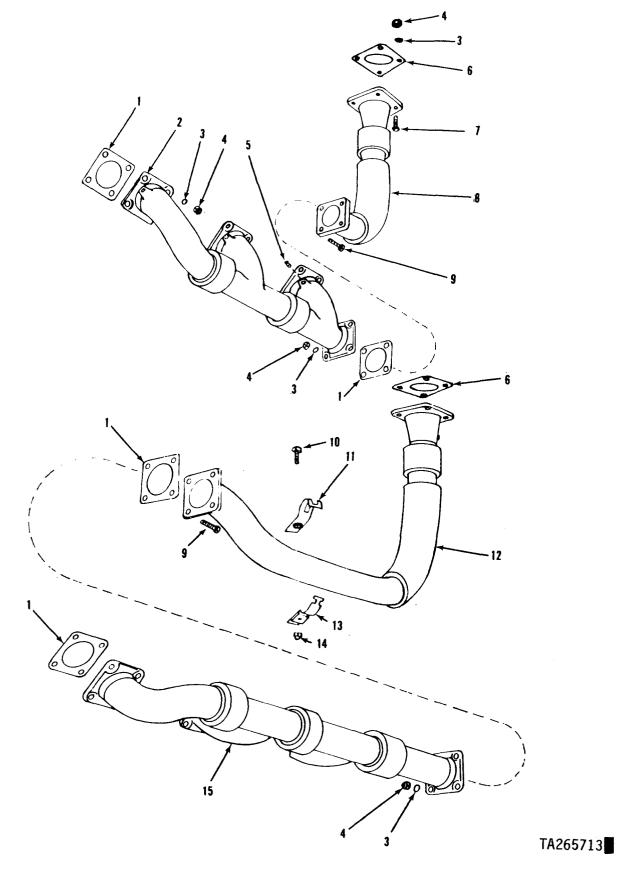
Exhaust manifold and associated parts (left bank) - exploded view.
